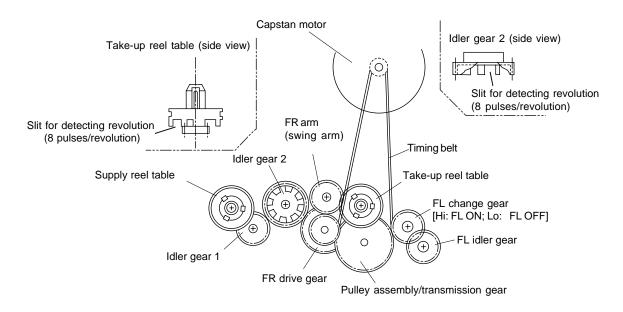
Mechanism that Drives Reel Tables and FL Mechanism (Top View)
